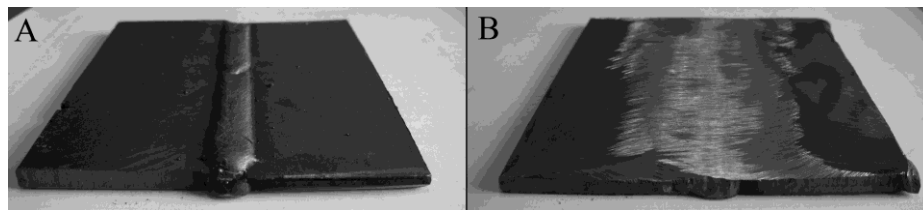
Welded plates. A. as-weld, B. tip and root of the weld are ground
